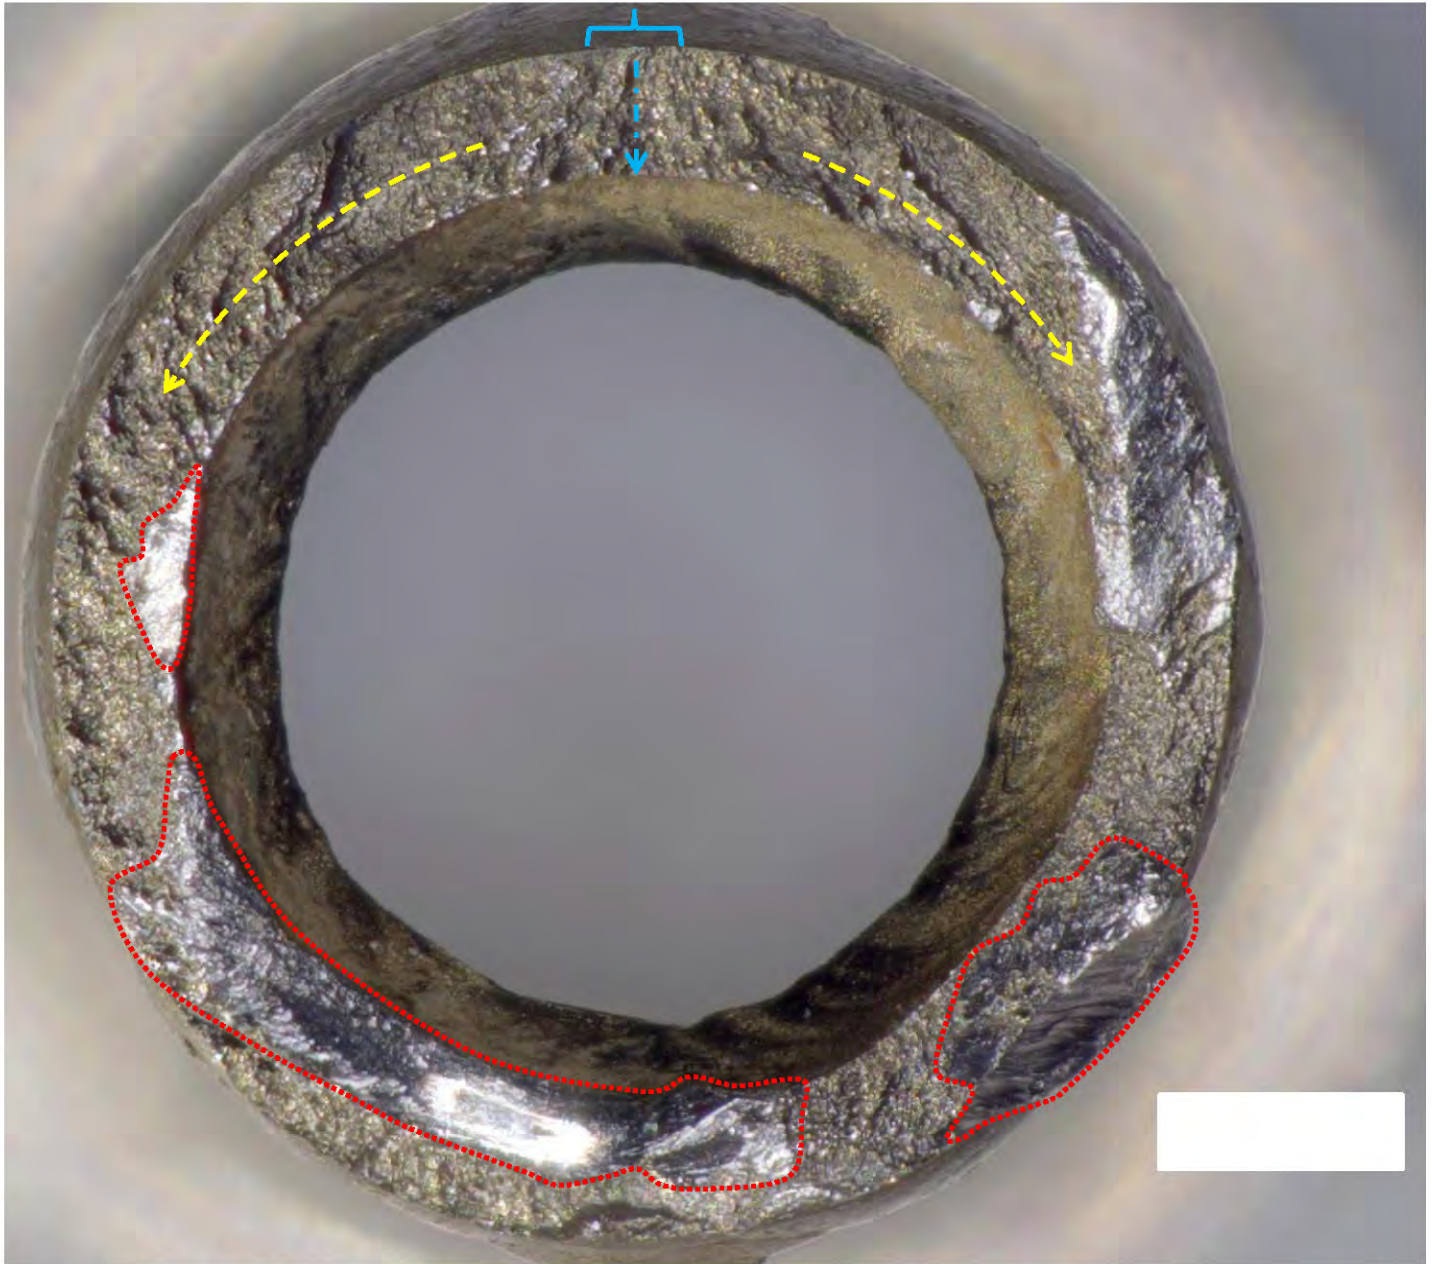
Detailed view showing the fitting side fracture surface after cleaning. The fracture features radiated from the outer diameter near the top directly through the thickness of the tube (blue brace and arrow), shown in Figure 14. The fracture features radiated away from the through-thickness fractured area around the circumference in both directions (yellow dashed arrows). The fracture exhibited smearing in several continuous areas around the circumference of the tube (red dashed outlined areas).
